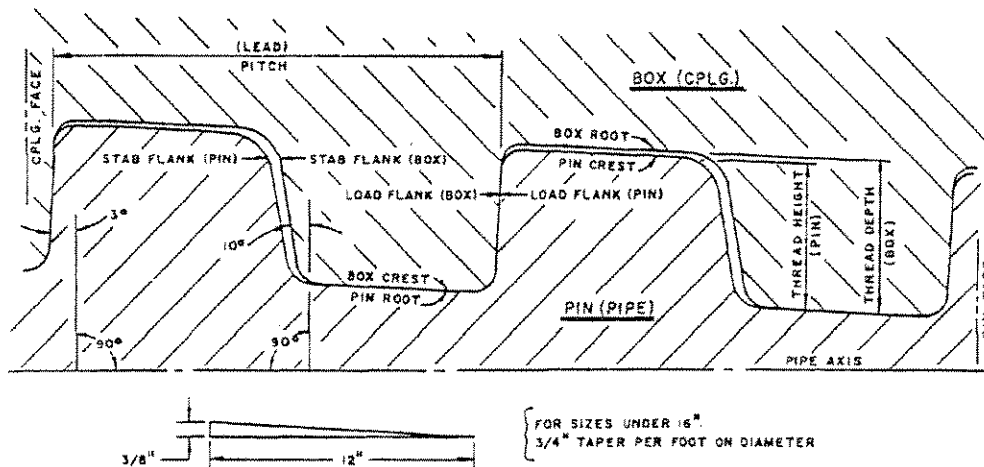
Thread Configurations [38,39], Buttress Threads
